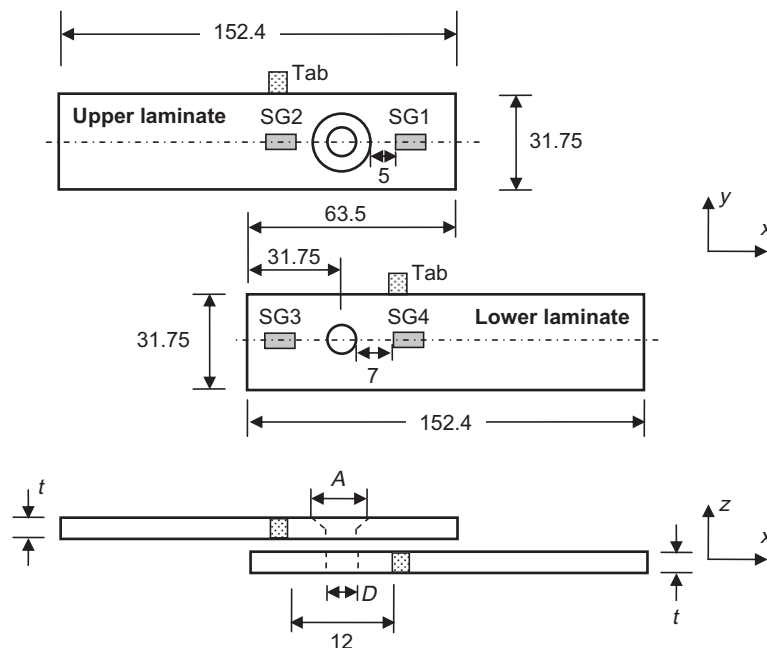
Countersunk joint geometry and dimensions (mm), strain gauge locations and extensometer tabs.
